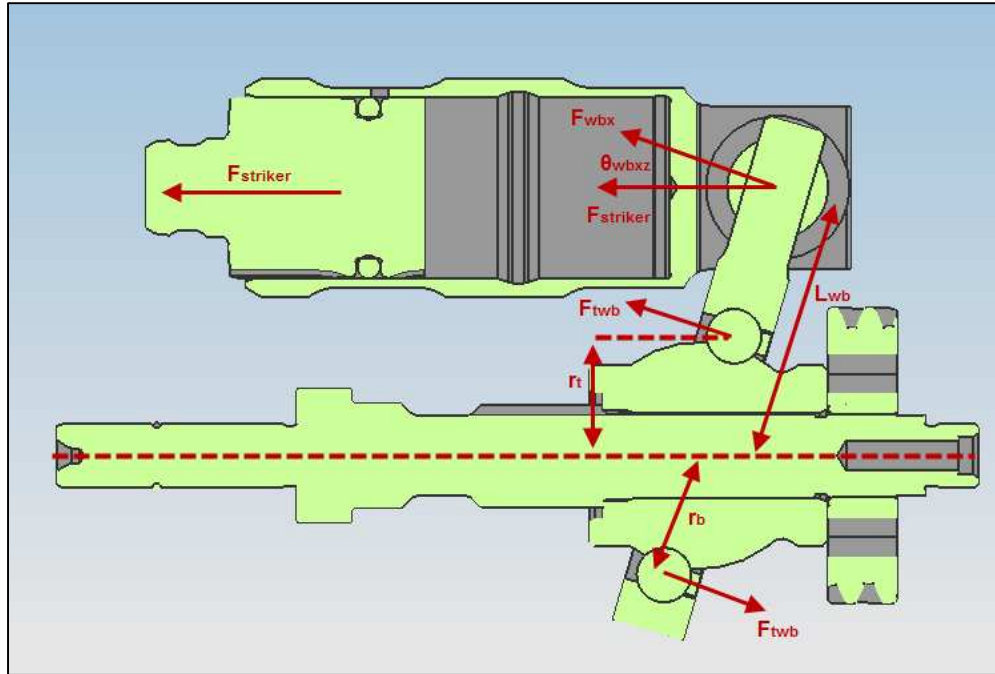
Striker and wobble bearing forces, X-Z plane
